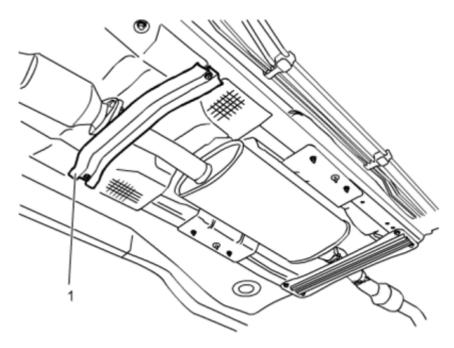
Identifying Floor Tunnel Front Brace Courtesy of SUZUKI OF AMERICA CORP.
